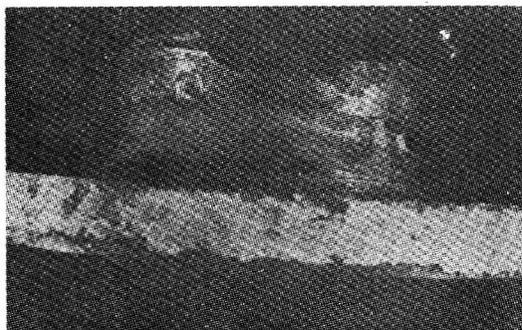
Upper portion of the valve showing machining defect x 0.65
